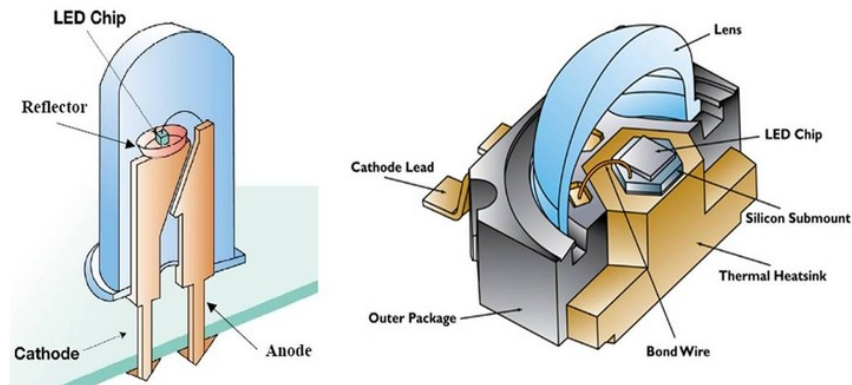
The two main types of LED casing and their construction. With the Trough-Hole housing on the left and the Surface Mount housing on the right.
